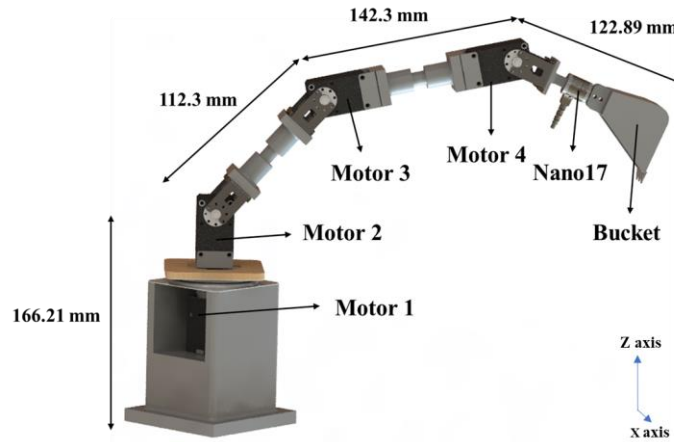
Physical Robotic Arm with a Bucket with dimensions
